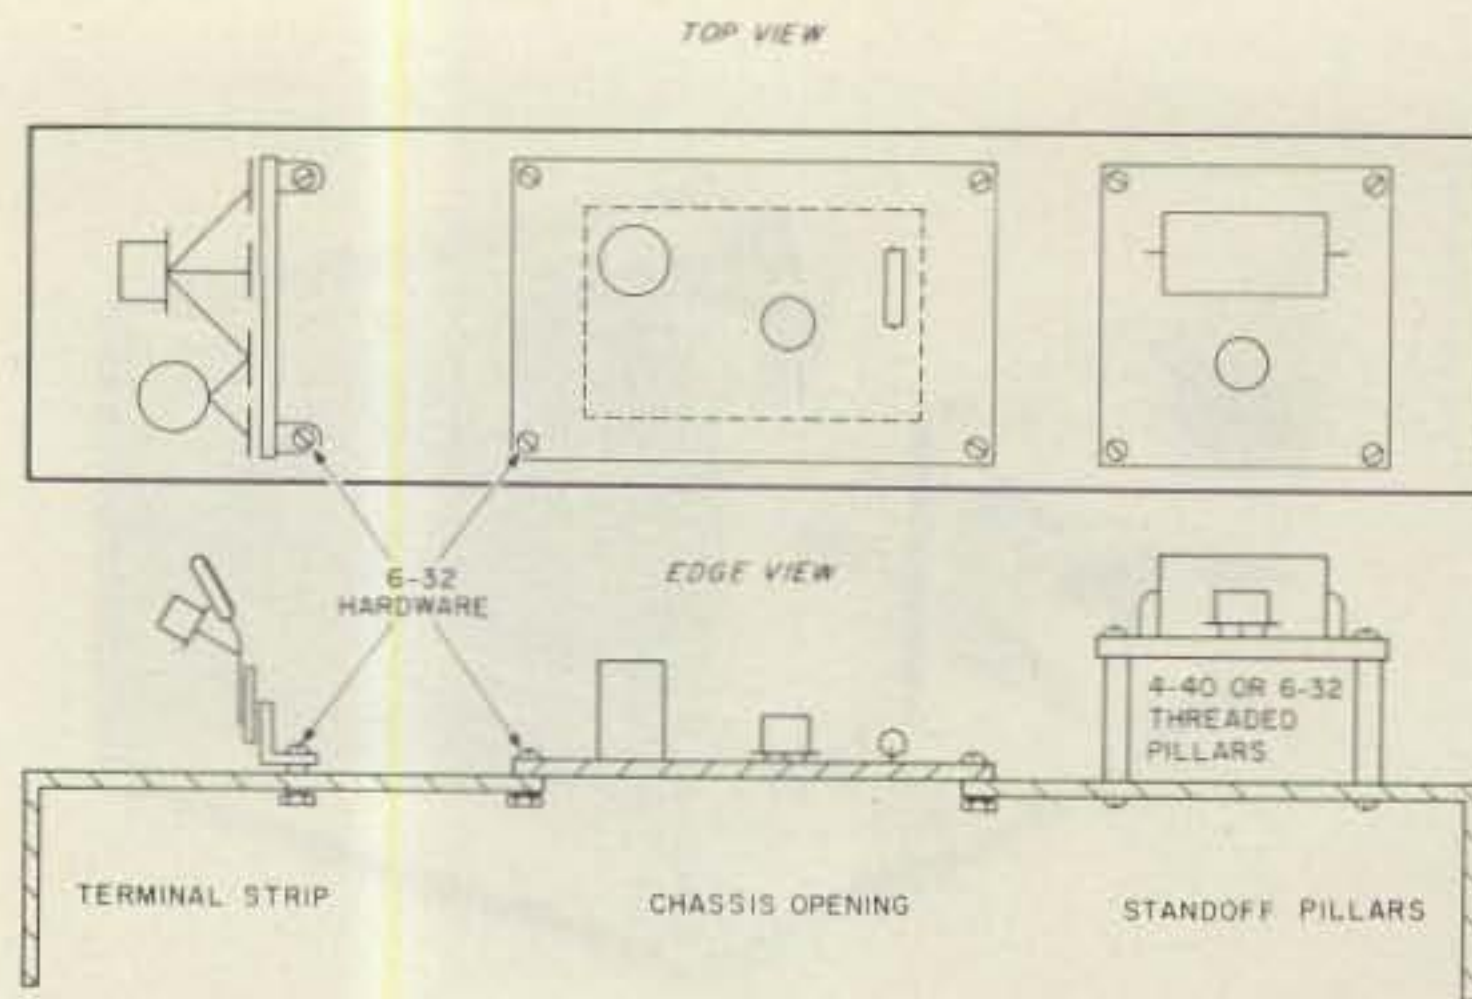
Three methods of mounting circuits to chassis or plates: terminal strips, chassis cutouts, and standoff pillars.
